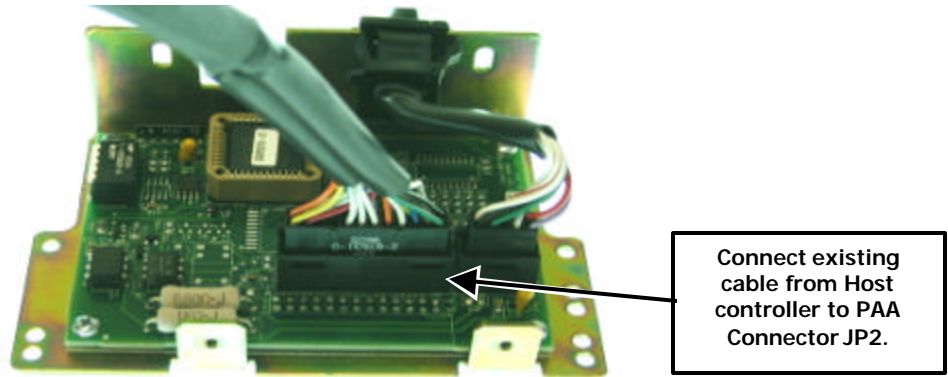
Protocol Adapter Assembly – Installation of 24-Pin Interface Cable
